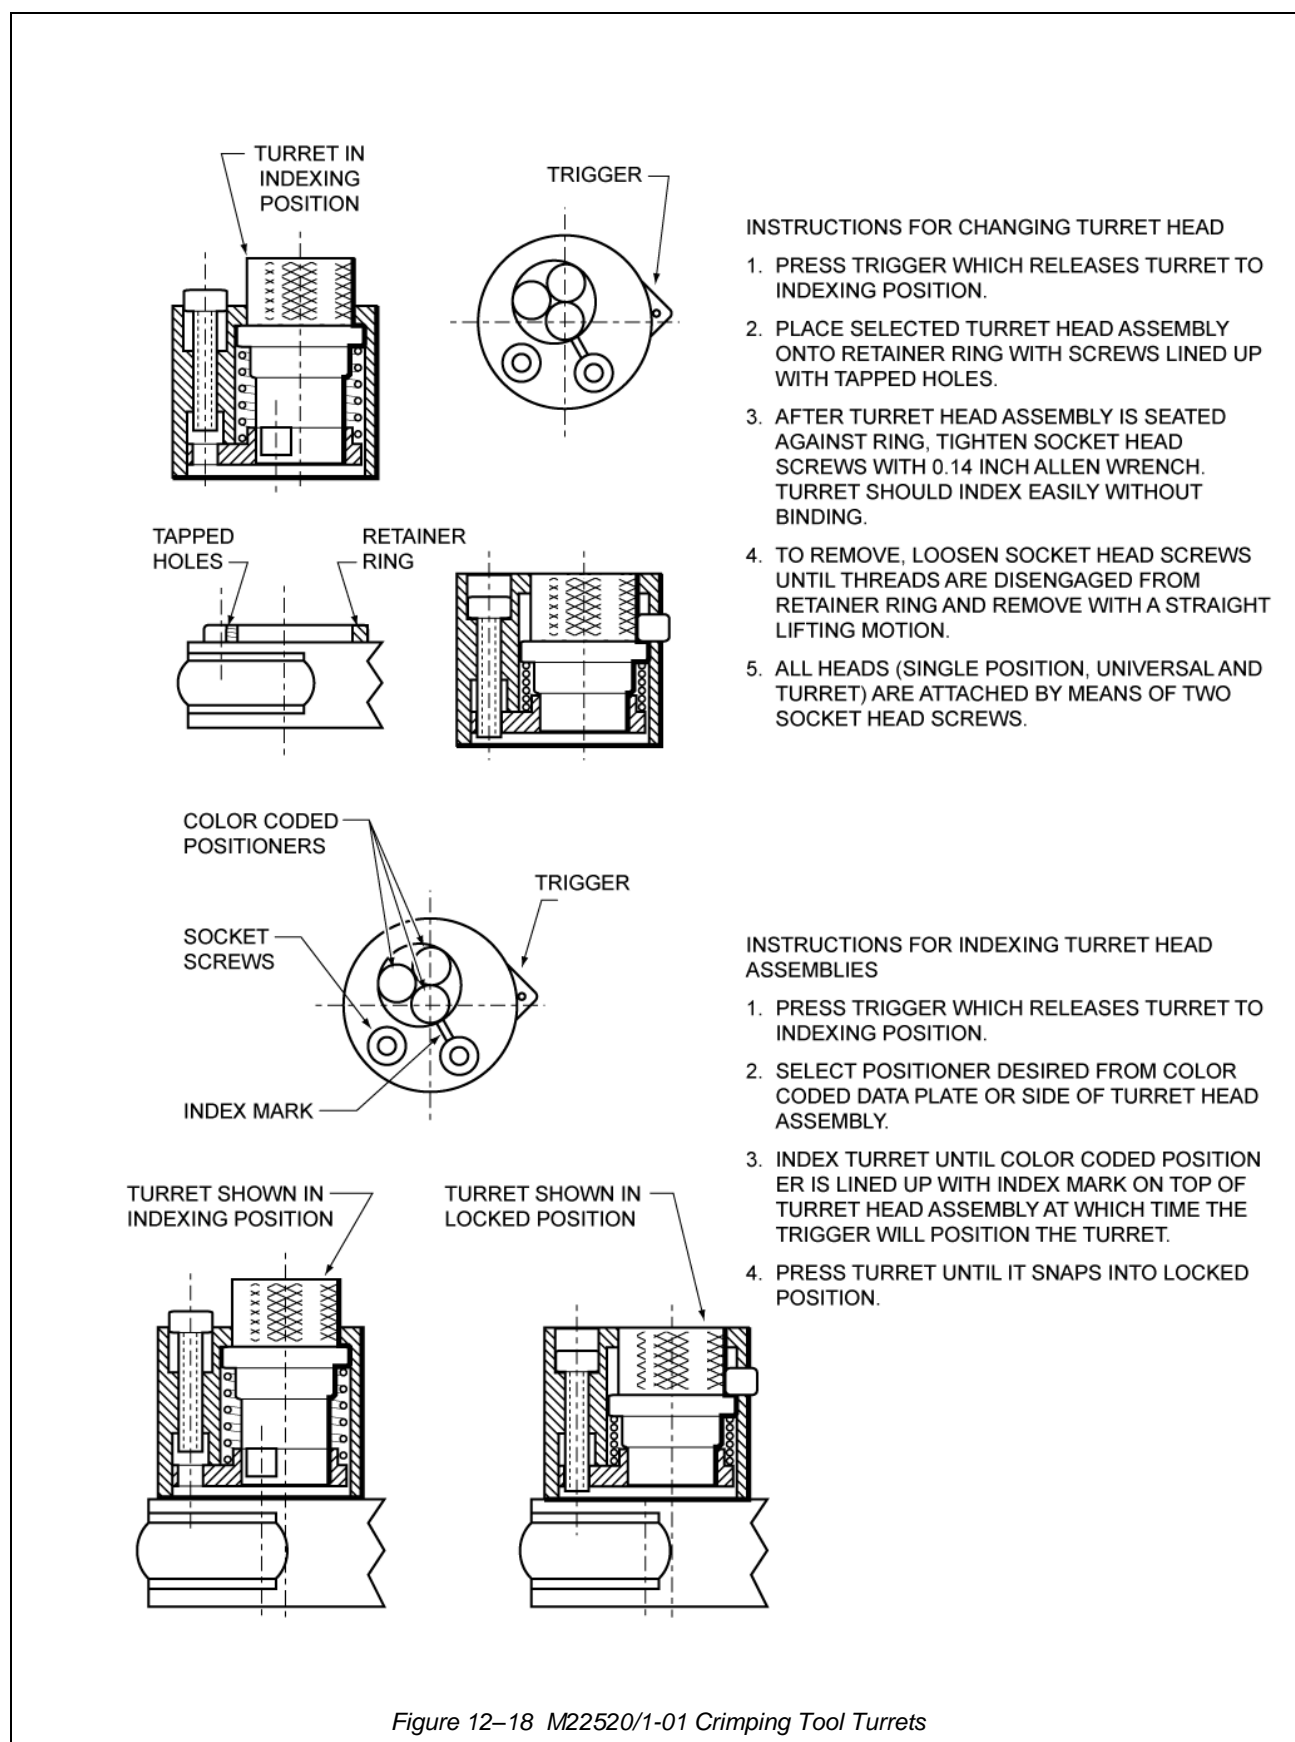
M22520/1-01 Crimping Tool Turrets
